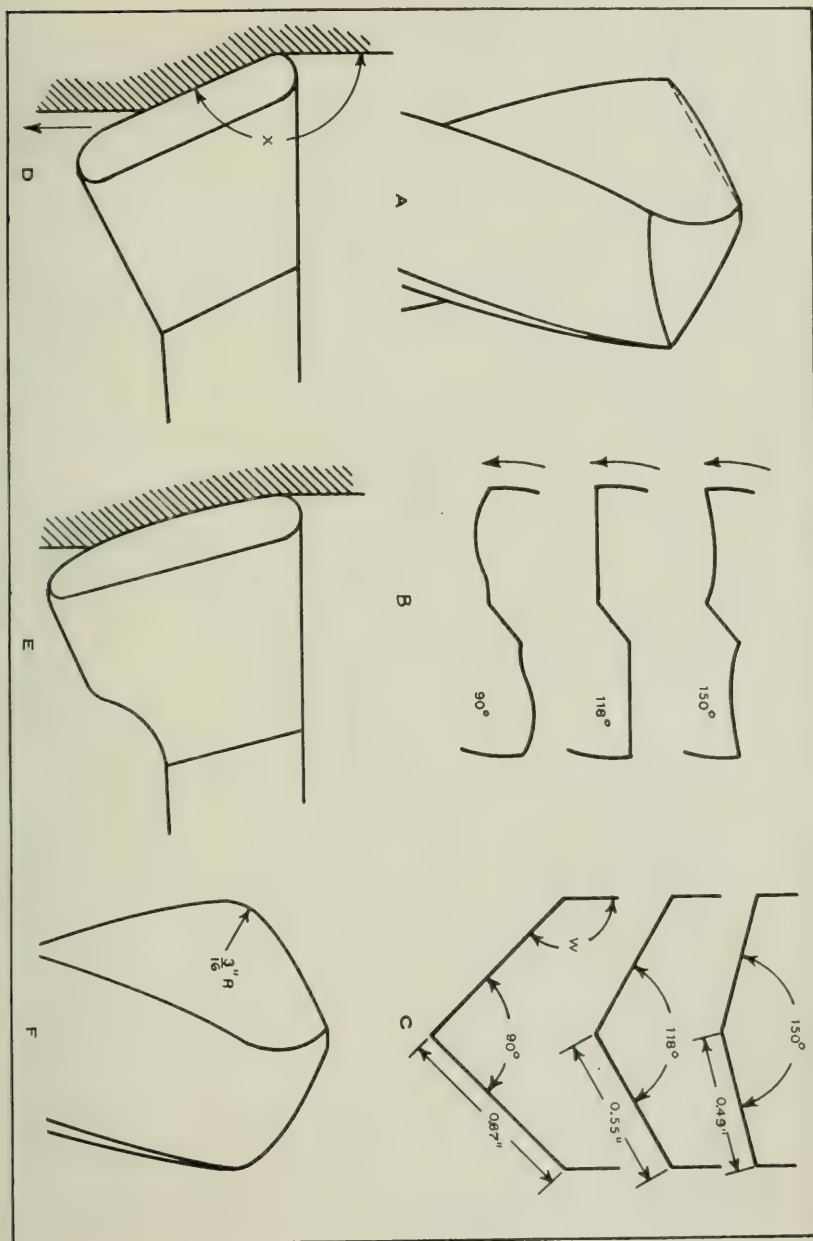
CUTTING EDGES AND ANGLES OF DRILL POINTS
